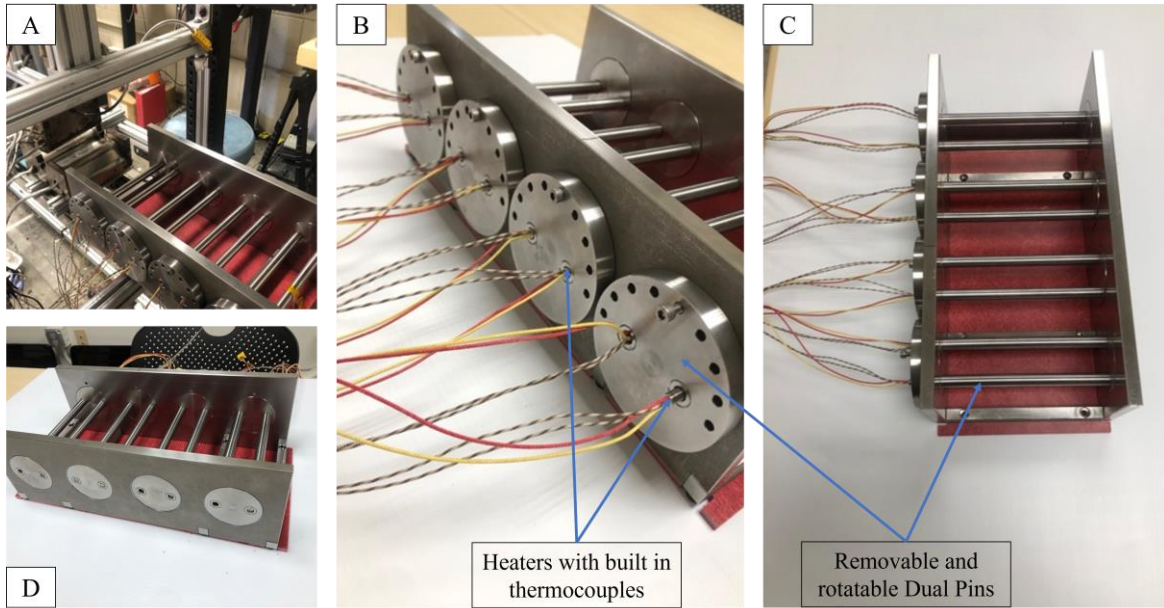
New Pin Die System. (a) View of Pin die system mounted onto the tape impregnation (b) Front side view showing heater and thermocouple wires inserted into rotating pins. Pins can be turned and locked into places at intervals of 22.5° covering a 180° operational window. (c). Top view (d) Back side view
